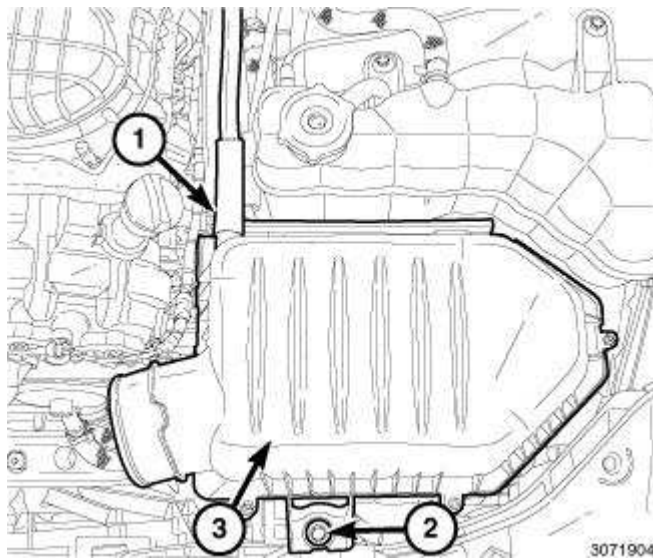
Fresh Air Makeup Hose, Air Cleaner Housing & Bolt
